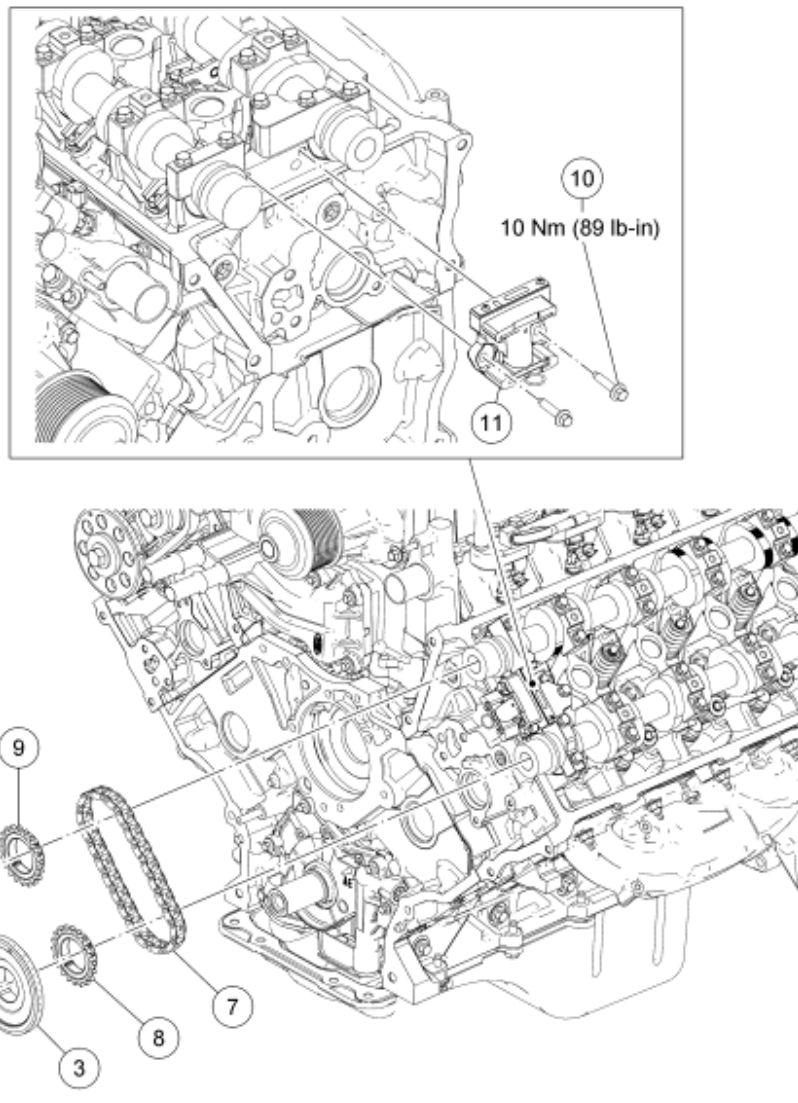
Exploded View Of LH Camshaft With Torque Specification (1 Of 2)
